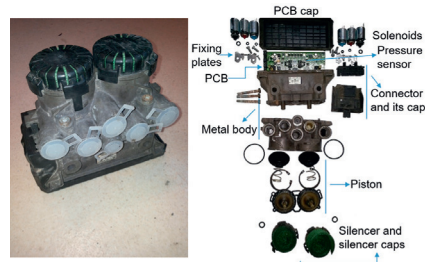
EBS-5, EPM-2 (left) and its exploded view (right)
